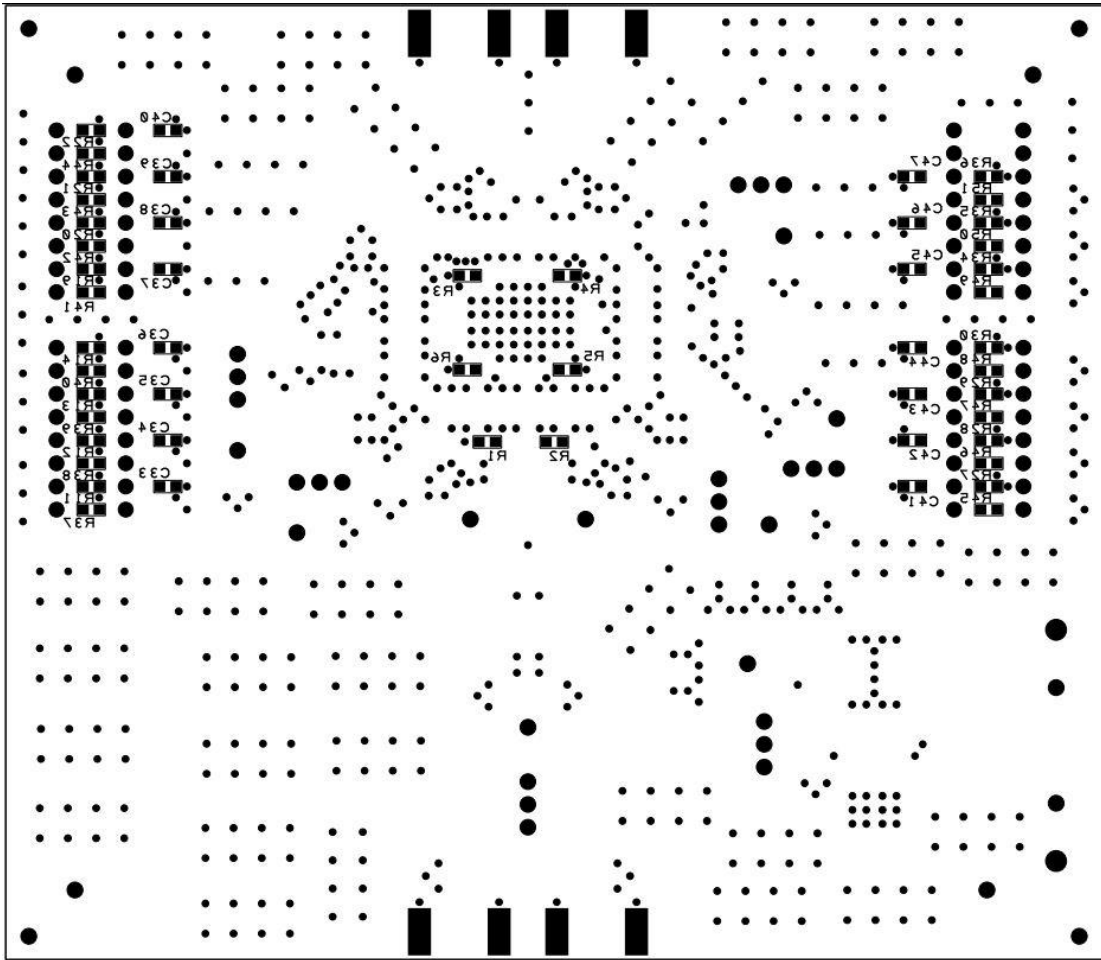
Component Locations on Bottom Layer of the Test PCB
